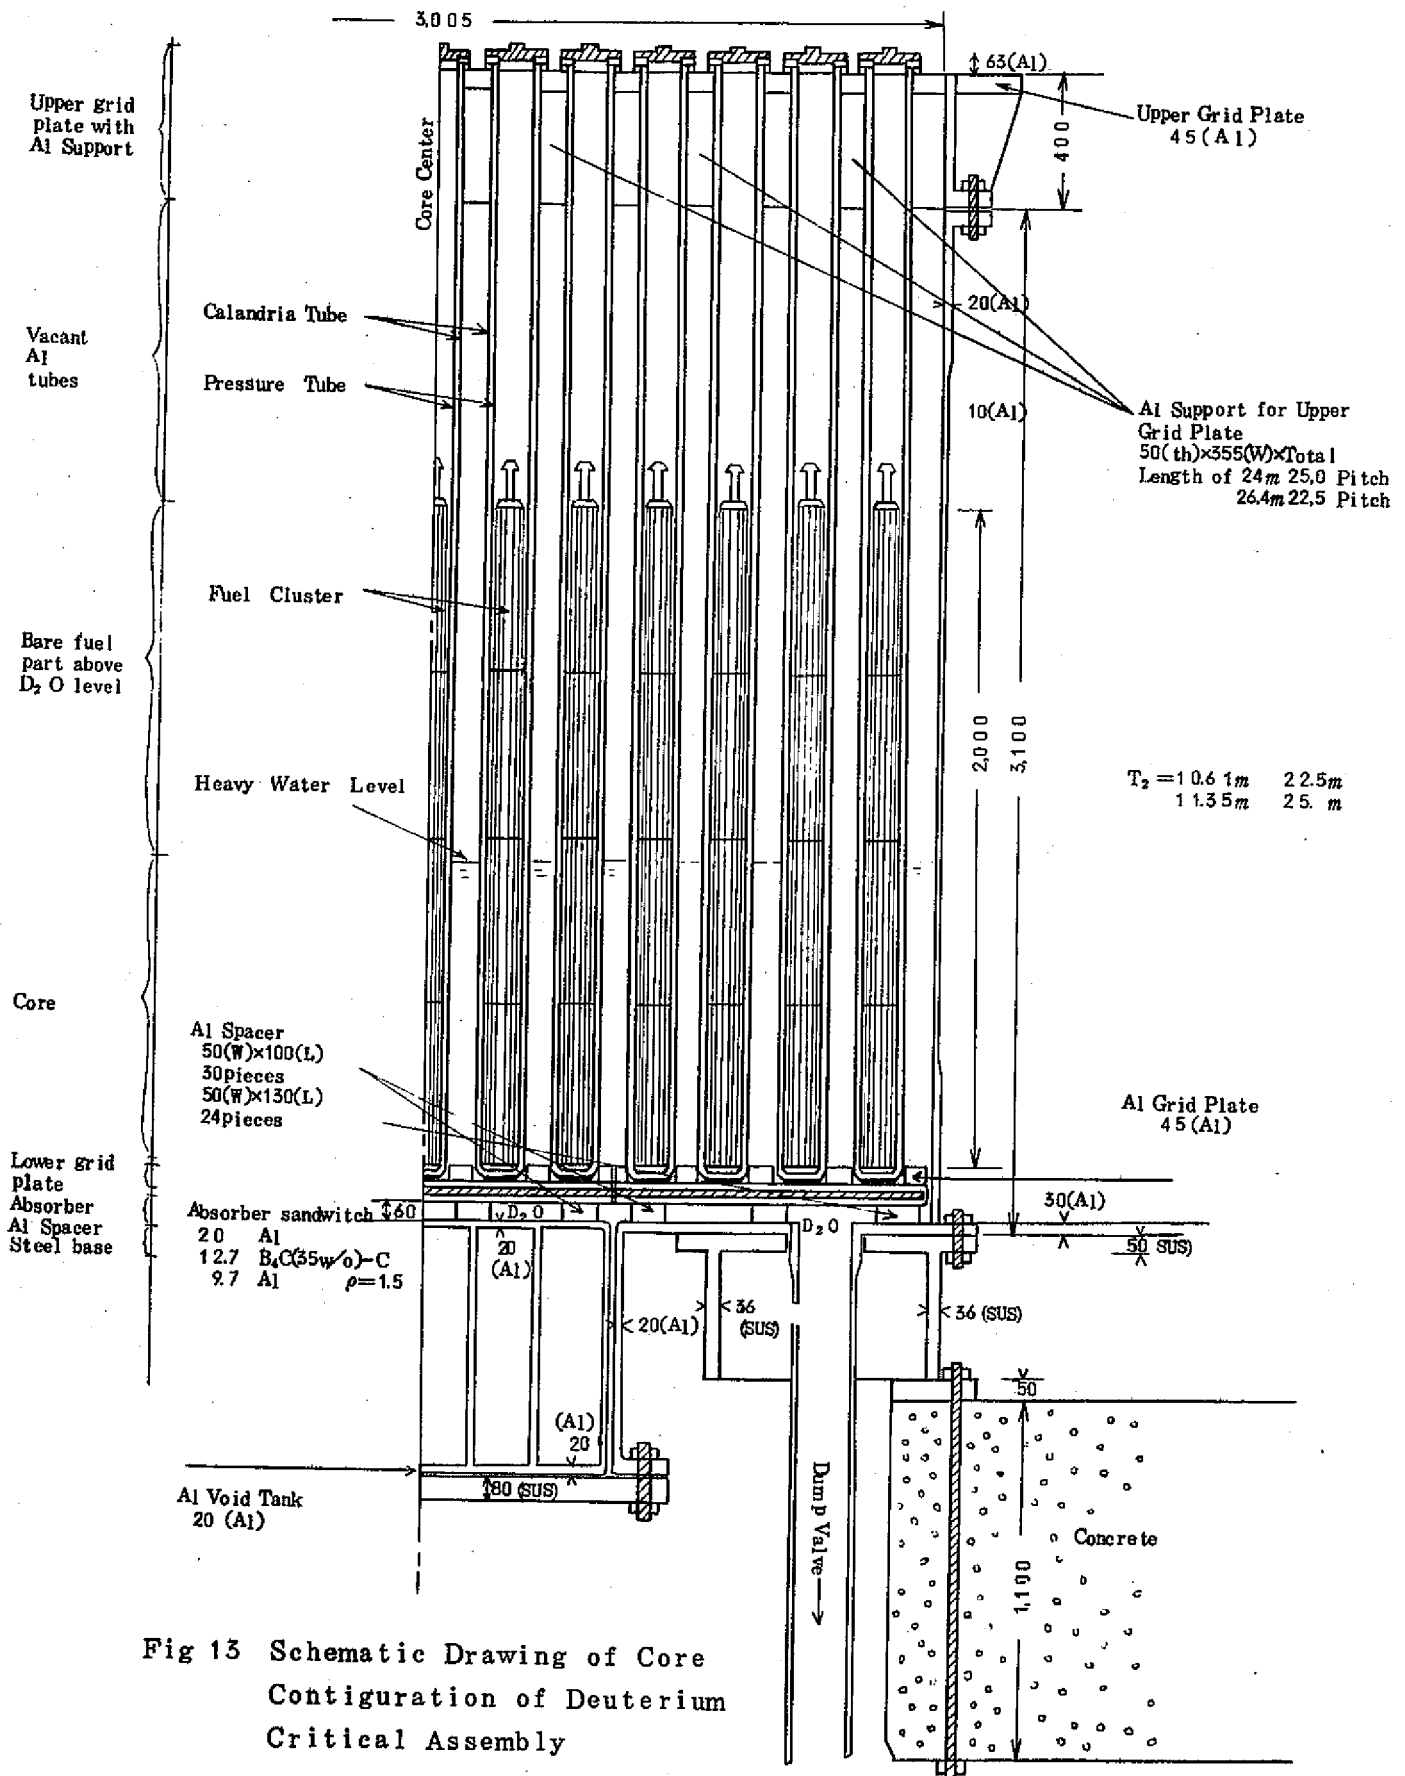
Schematic Drawing of Core Configuration of Deuterium Critical Assembly
